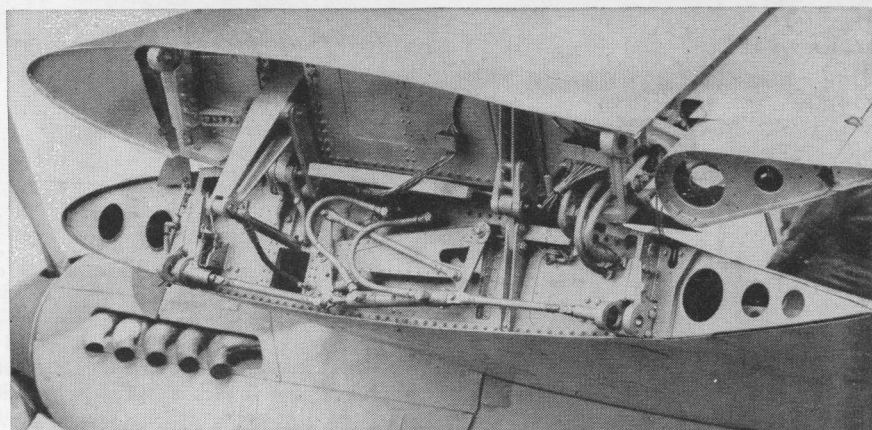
View from the aft to the rear spar of a de Havilland Hornet, revealing complete wing-folding mechanism and showing, just behind the rear spar the method of making electric and hydraulic connections between the center section and the folding outer panel.
